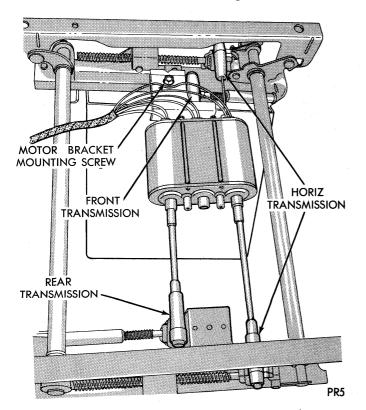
Seat Track Identification "C" Body 50/50 Seat
